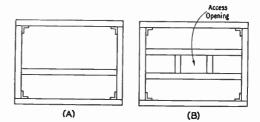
In the front and back frames (A) a crosspiece is added as a support for the control panel and terminal board, respectively. The top frame (B) has additional members to accommodate an access opening.
